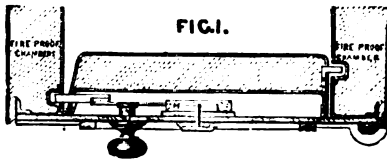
is an Engraving showing Section through door and parts of sides of the Fire-proof Safe usually sold by respectable Manufacturers.
